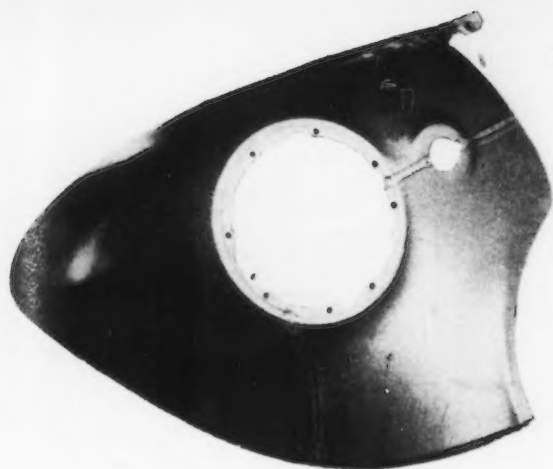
The welds in the Futuramic fender radiate from the headlamp opening and are nearly flush with adjacent surfaces.
